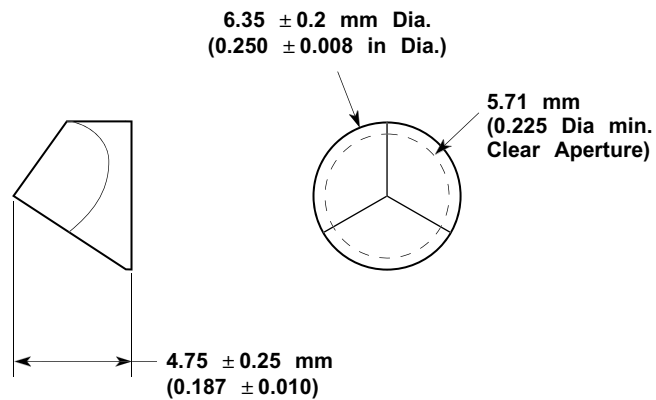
B-6. Agilent 10713D Cube Corner, no housing — dimensions
